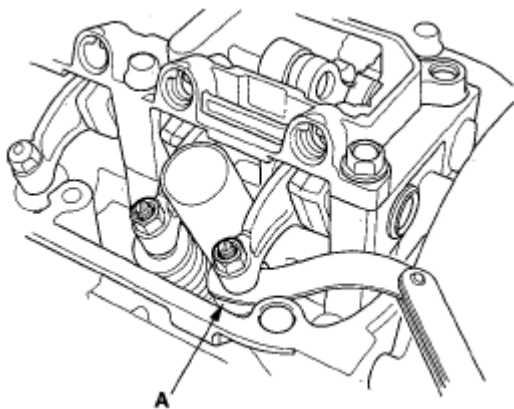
Identifying Feeler Gauge Between Adjusting Screw And End Of Valve Stem - Exhaust
